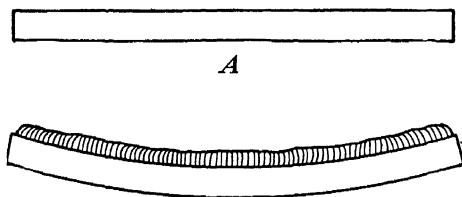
A. Straight bar. B. Bar curved after deposit of weld.
